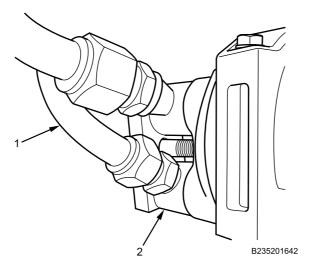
HVAC Compressor Discharge Hose at Compressor.
